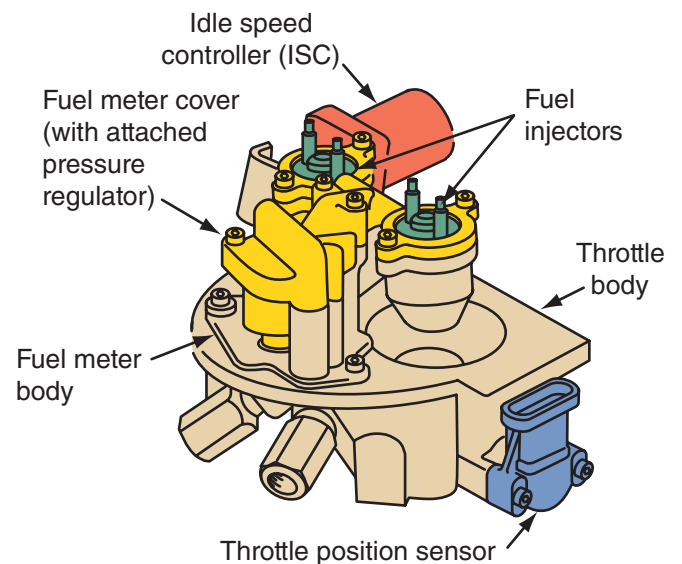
Dual throttle body assembly used on a six- or an eight-cylinder engine.
